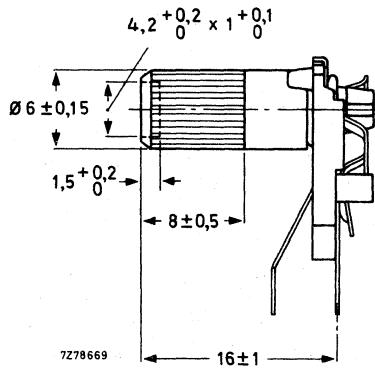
Test switch for vertical mounting, with adjustment knob at the side of the base plate.
